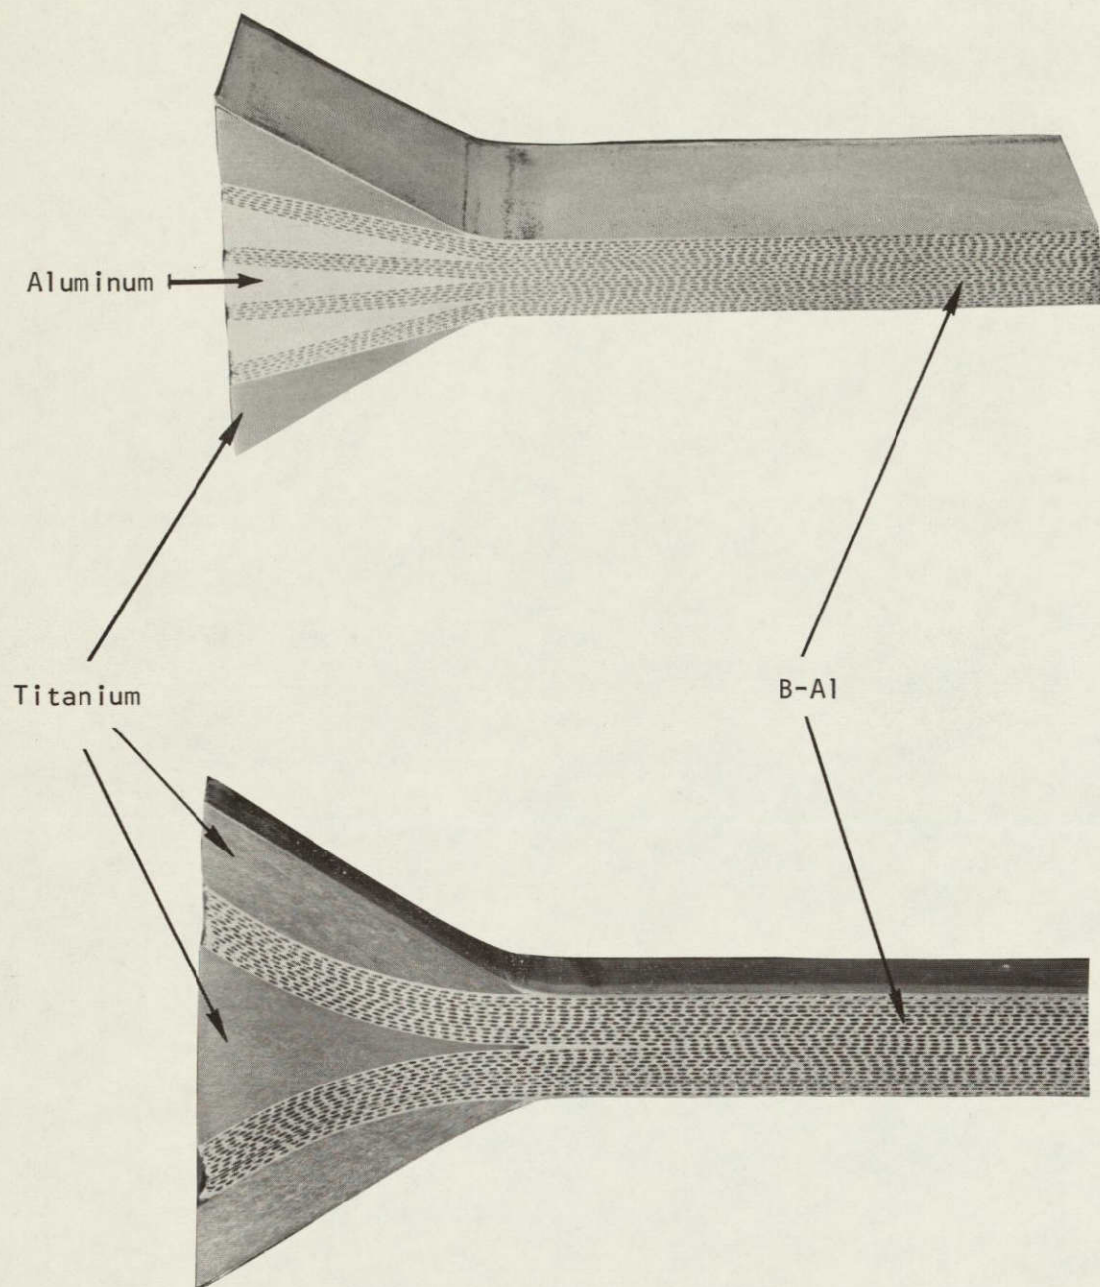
Macrophotographs of Bladelike Shape Test Specimens of Triple and Single Inner Wedge Designs.
